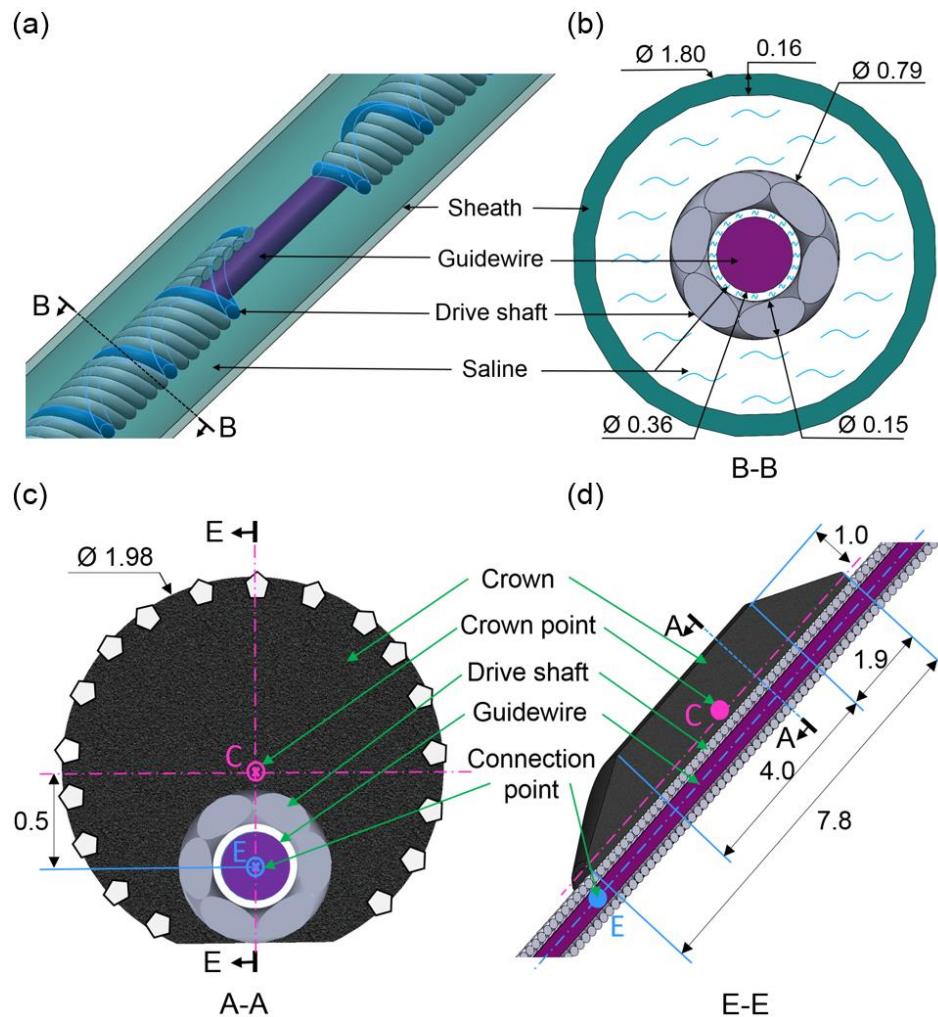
Catheter: (a) the guidewire, drive shaft and sheath, (b) cross-section B-B, (c) crown cross-section A-A, and (d) cross-section E-E. (unit: mm)
